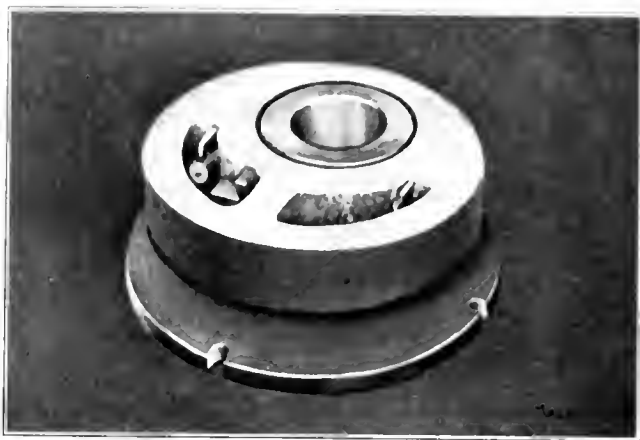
Fixture for Holding Eccentrics on the Boring Mill while turning the Outside
